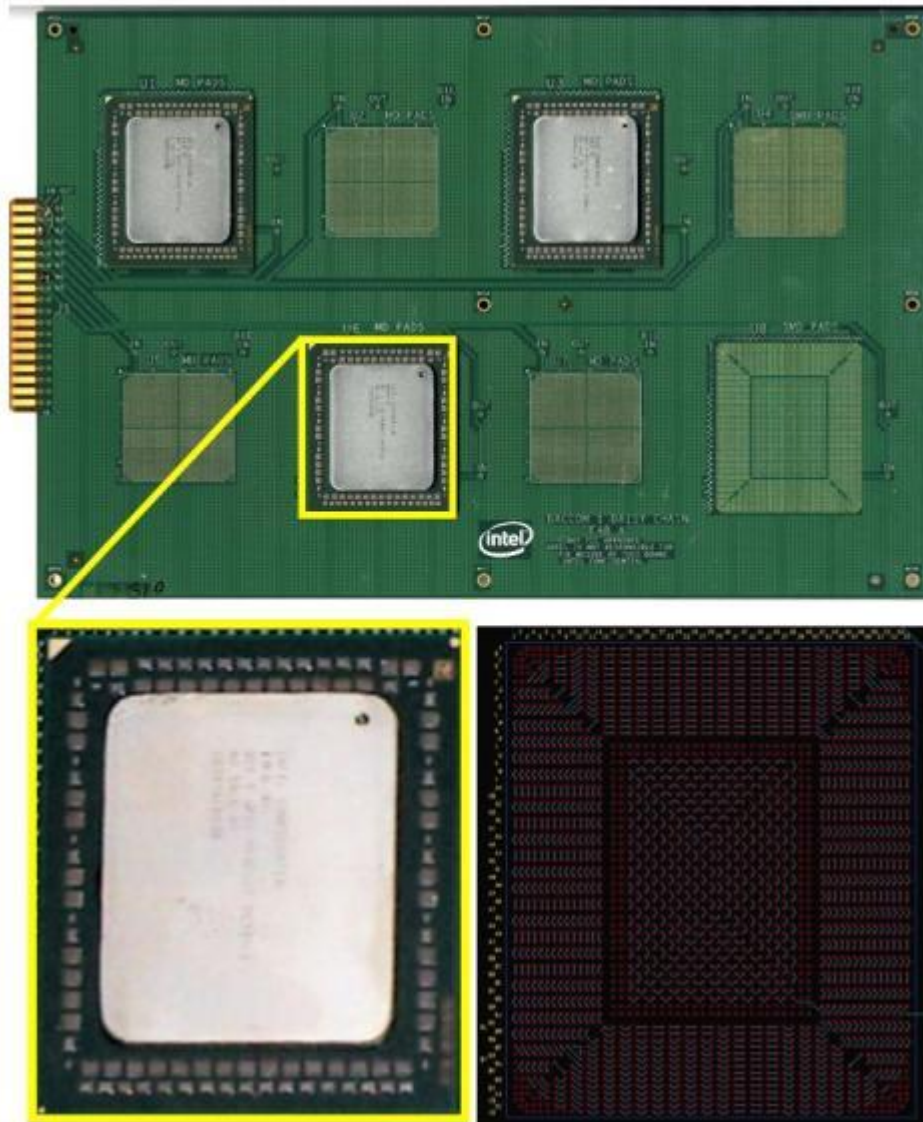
Populated daisy chained test board, top view of large body-BGA and BGA pin diagram.
